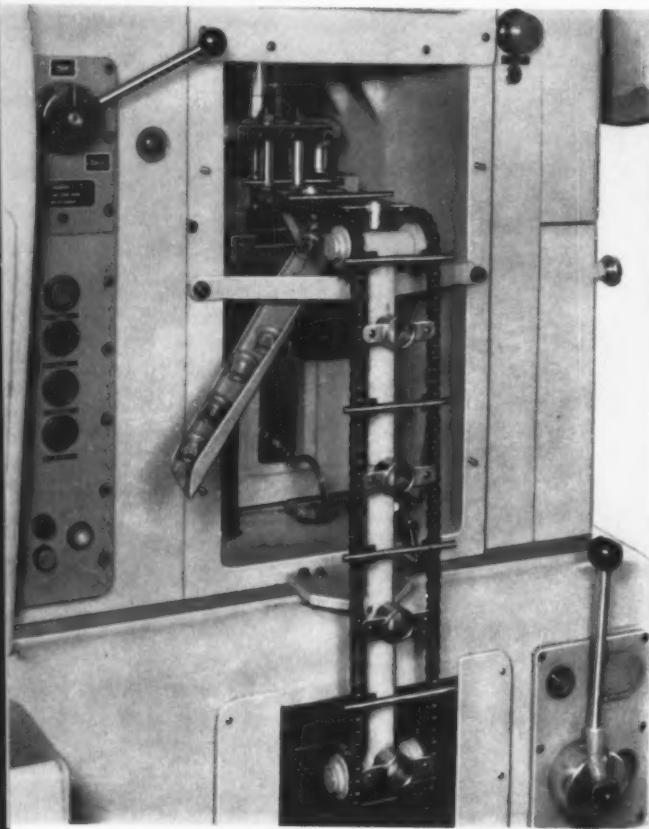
Continuous die loading from one direction is achieved by a chain drive. This mechanism replaces a reciprocating shuttle slide for parts of simple shape not requiring precise location or alignment.
